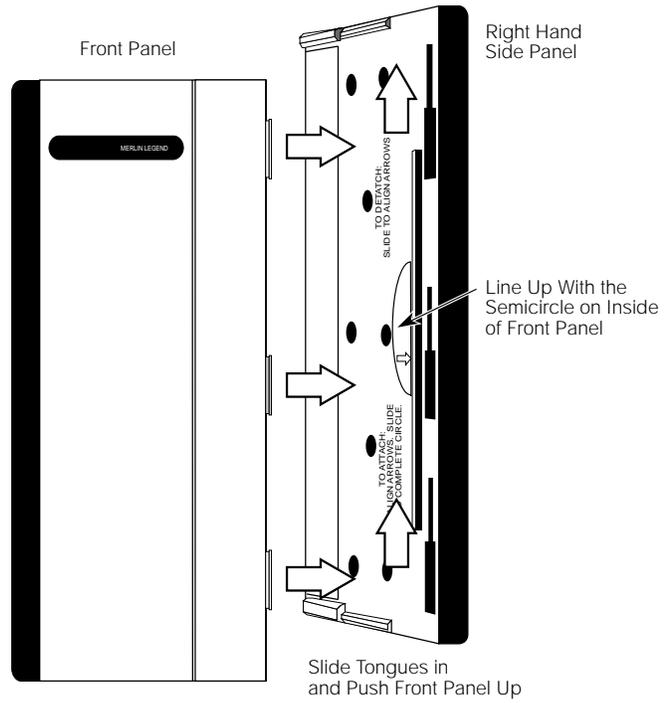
Assembling the Control Unit Housing (Release 2.0 and Earlier)
